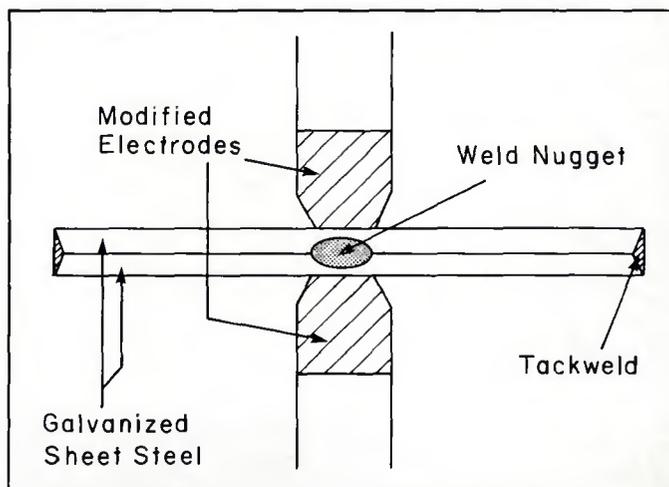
Vertical cross-sectional view of the weld. The camera views just the area around the nugget and electrode tips
